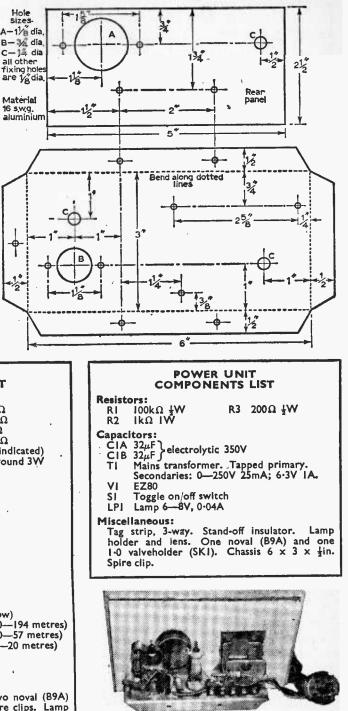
The drilling details and dimensions of the power-pack chassis and rear panel.
